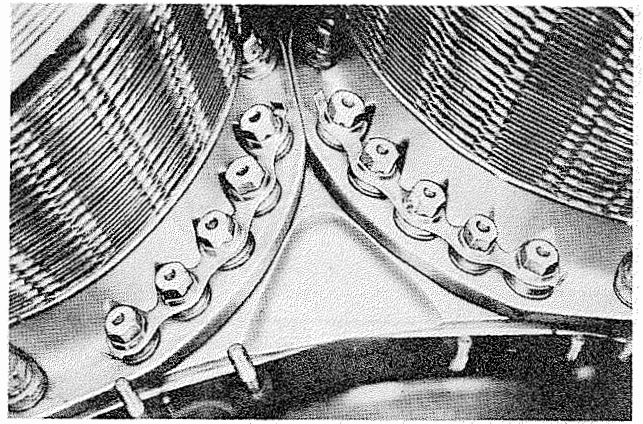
Lock Plates Secured to Cylinder Hold-Down Cap Screws
